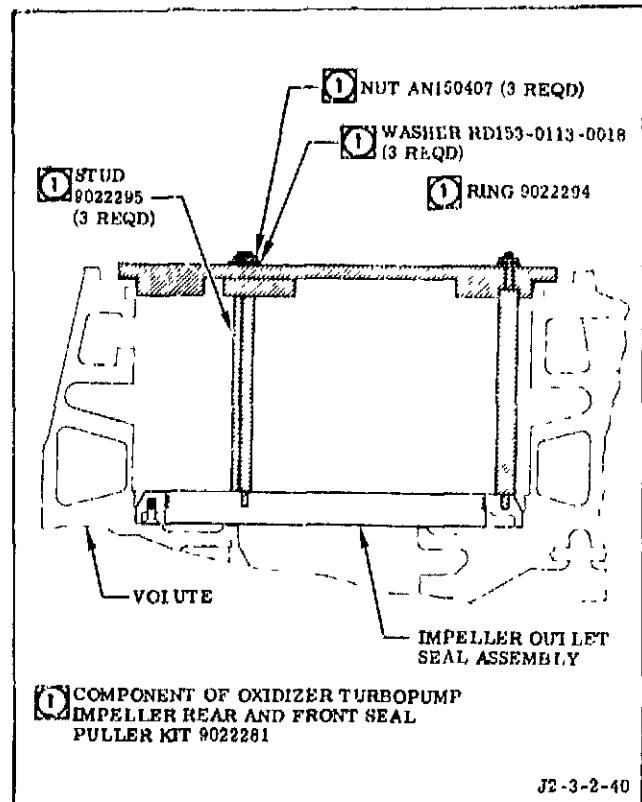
GSE Setup for Impeller Outlet Seal Assembly
